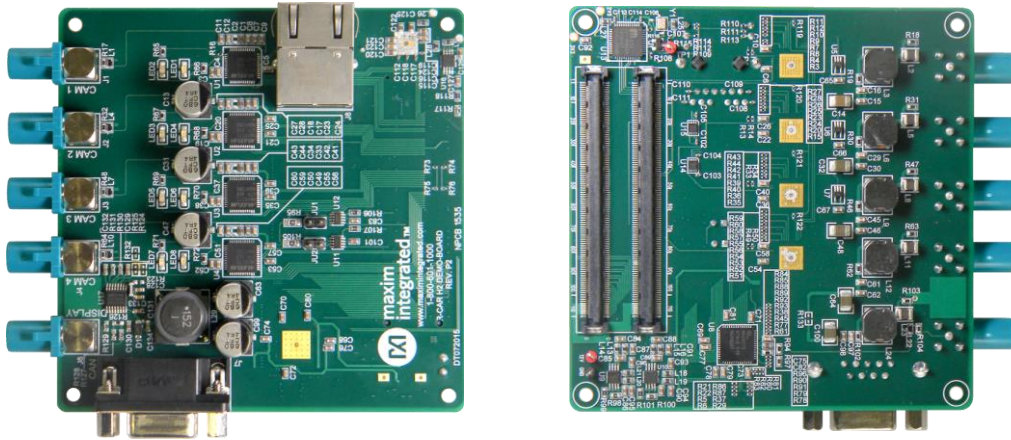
ADAS Surround View Kit PCB view top / bottom
